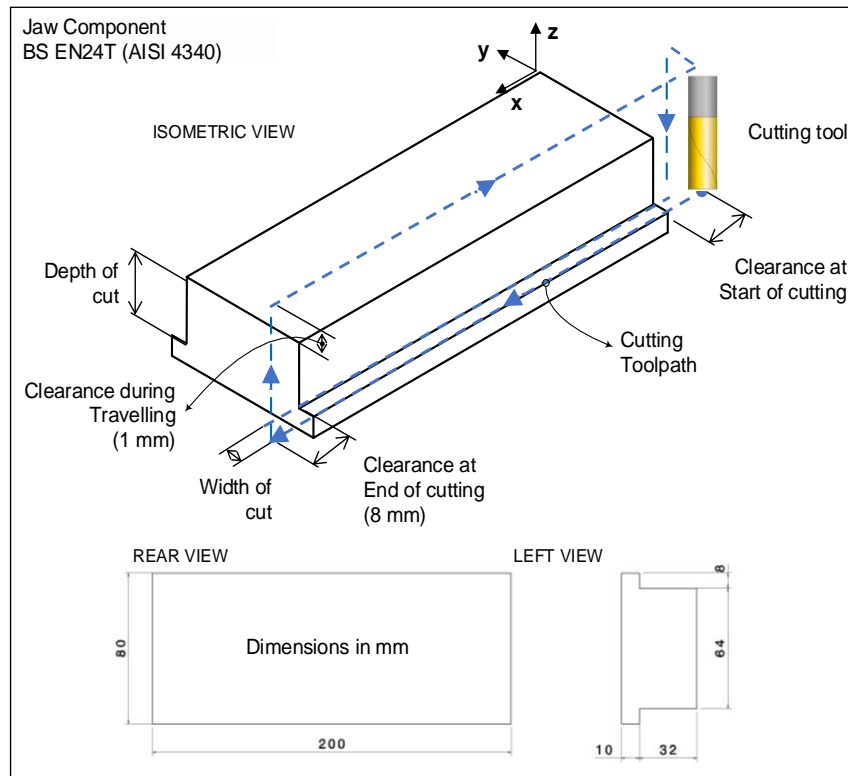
CAD design of the machined metal component and dimensions with side milling operations.
